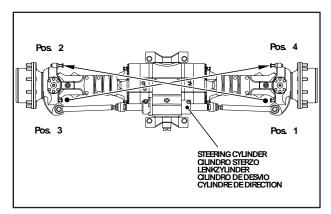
ADJUSTING THE STEERING ANGLE Loosen the nut of one of the adjusting screws on cylinder side
